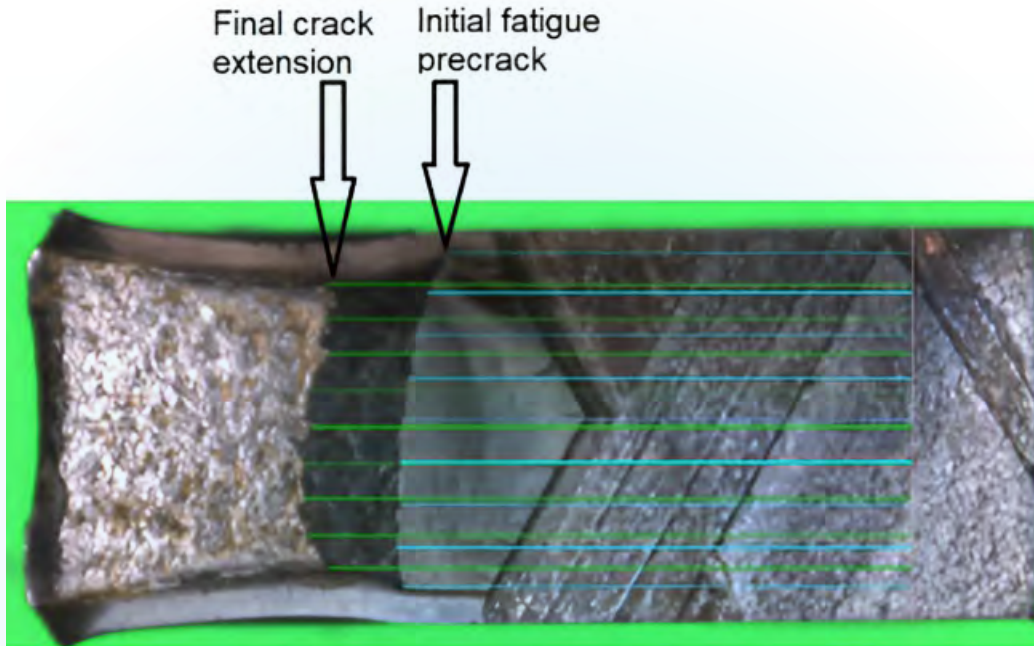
Optical image of a sample after fracture toughness testing with both initial and final crack length measurement.
